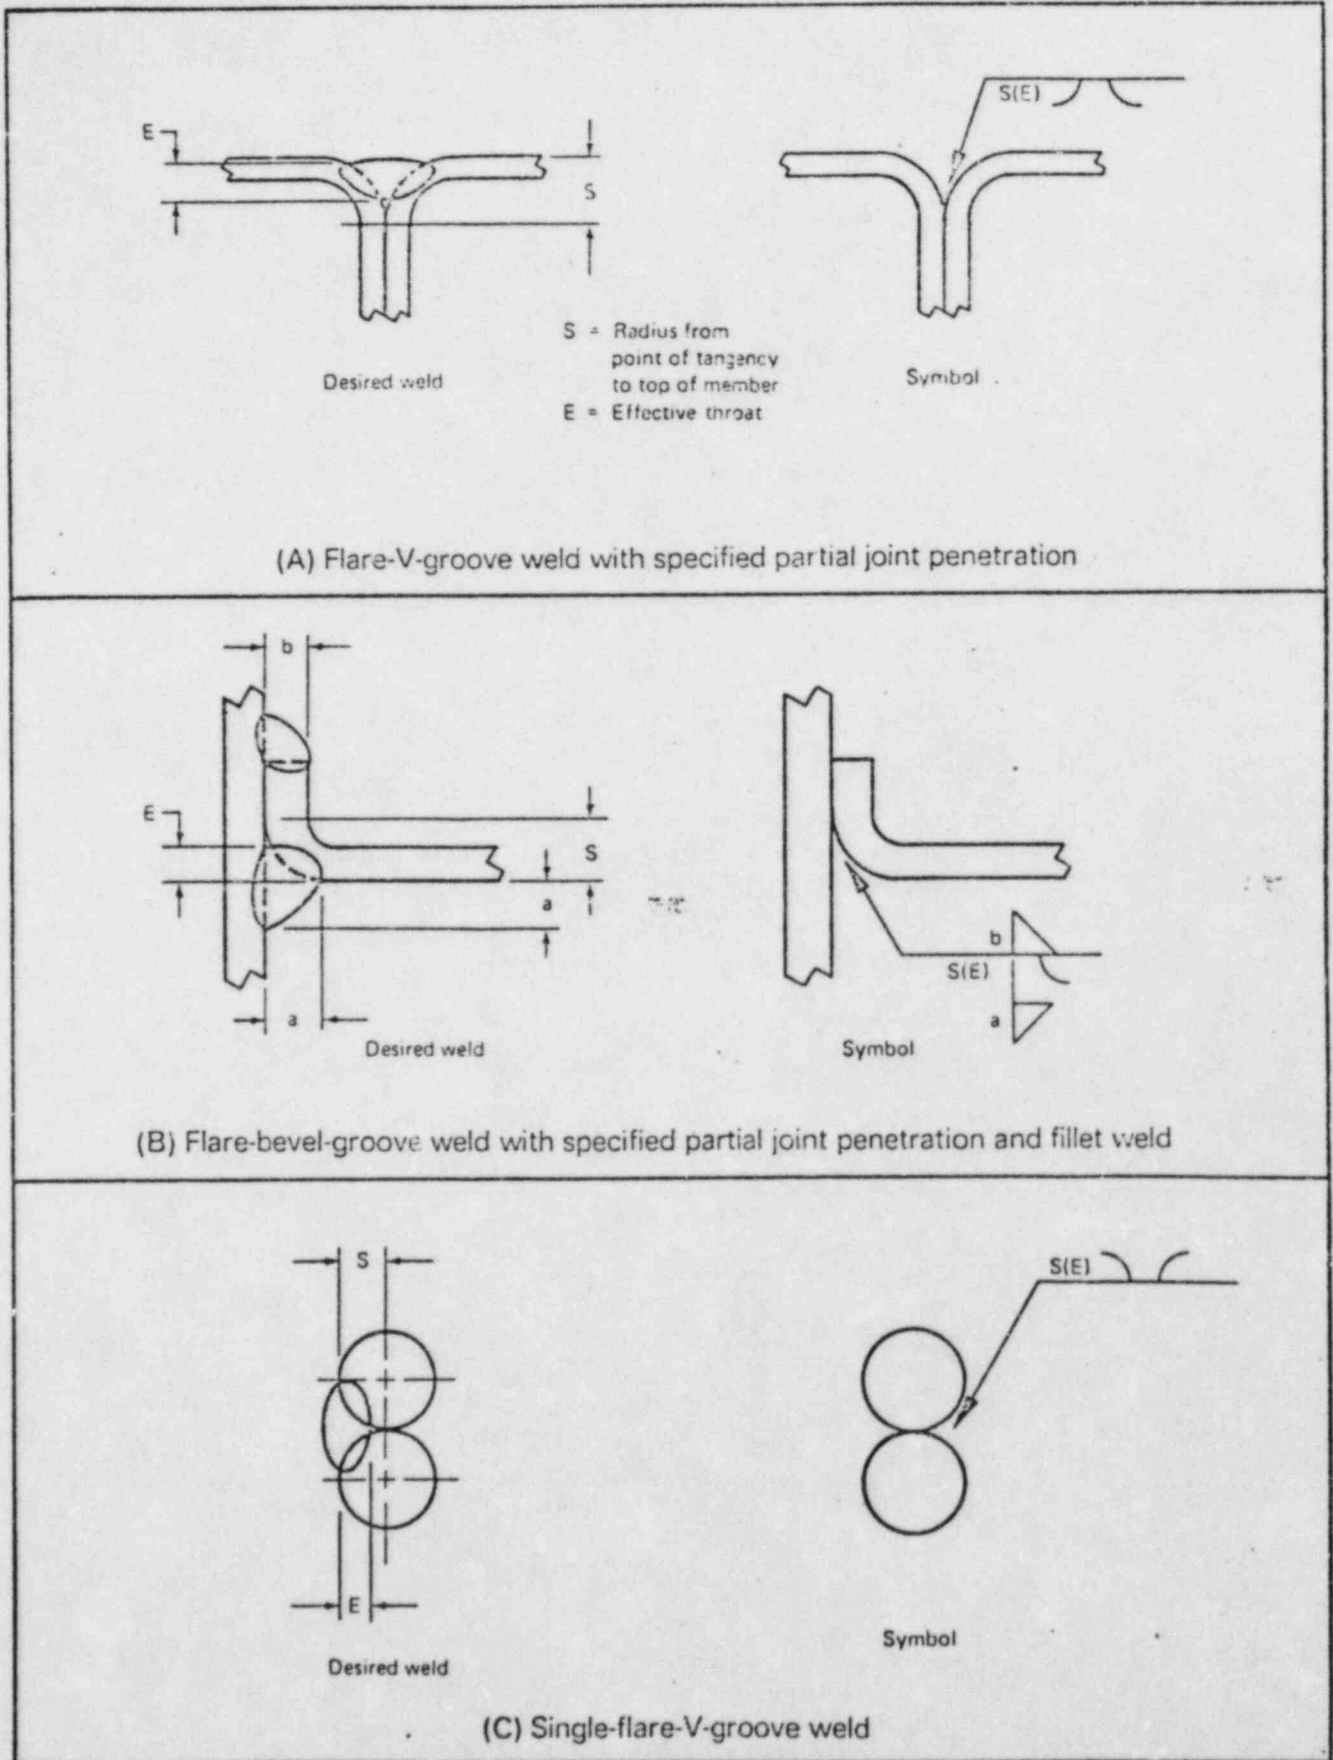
Application of flare-bevel- and flare-V-groove weld symbols
